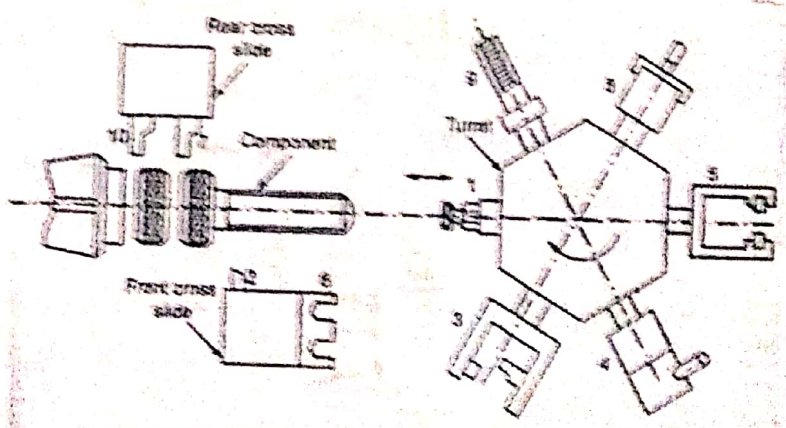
Tool layout for knurled screw and nut for Problem 2.26
